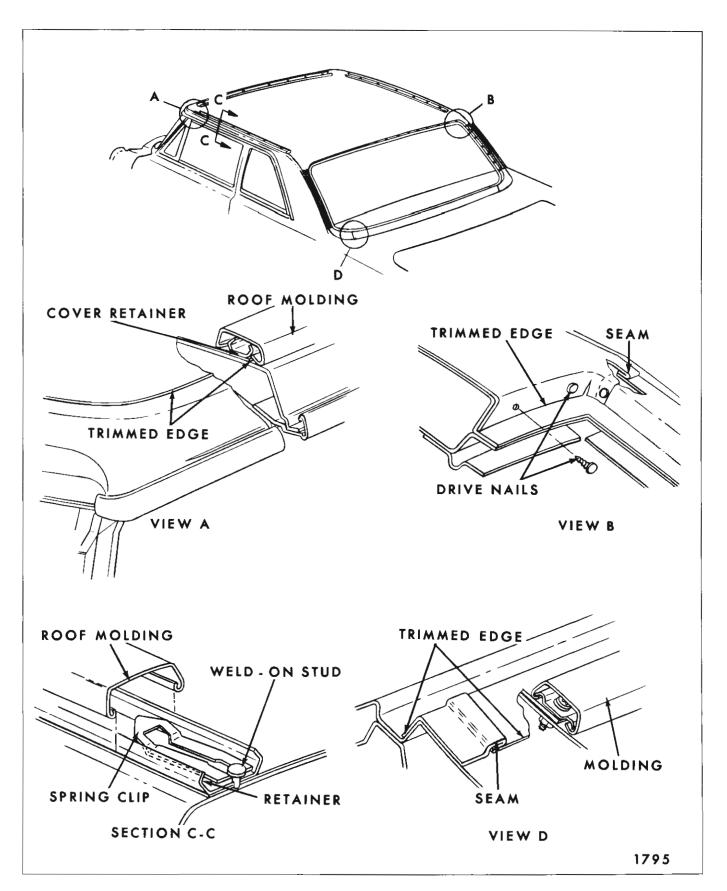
J6—Fabric Roof Cover Installation -44000 Series
